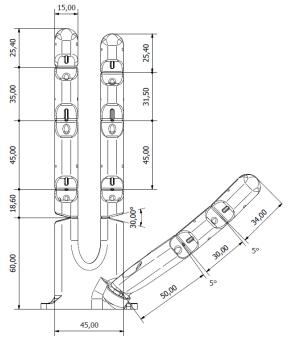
Final dimensions of the robot hand (Dimensions are in mm).
